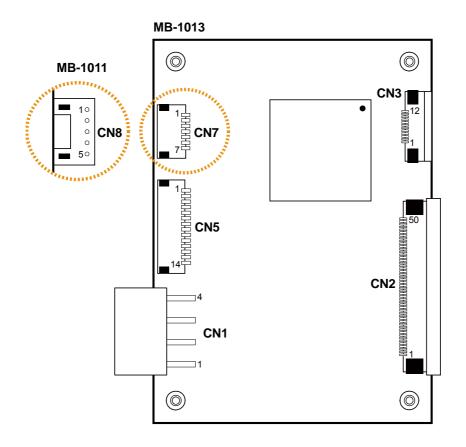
MB-1011 & MB-1013 Printer Board Component Locations
